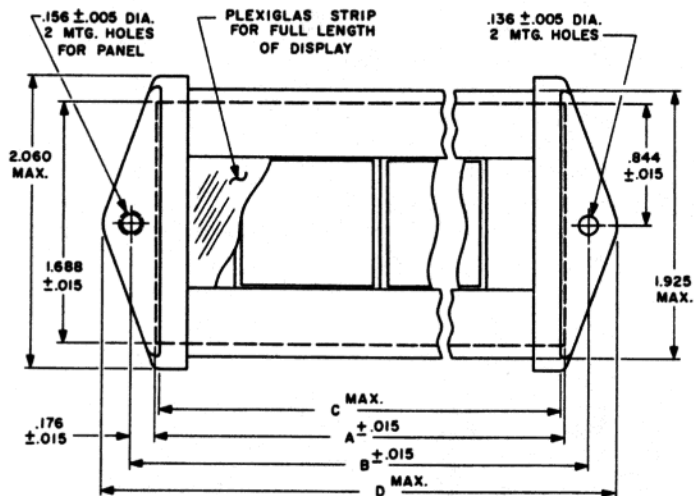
ASSEMBLY OUTLINE DRAWING — FRONT VIEW
